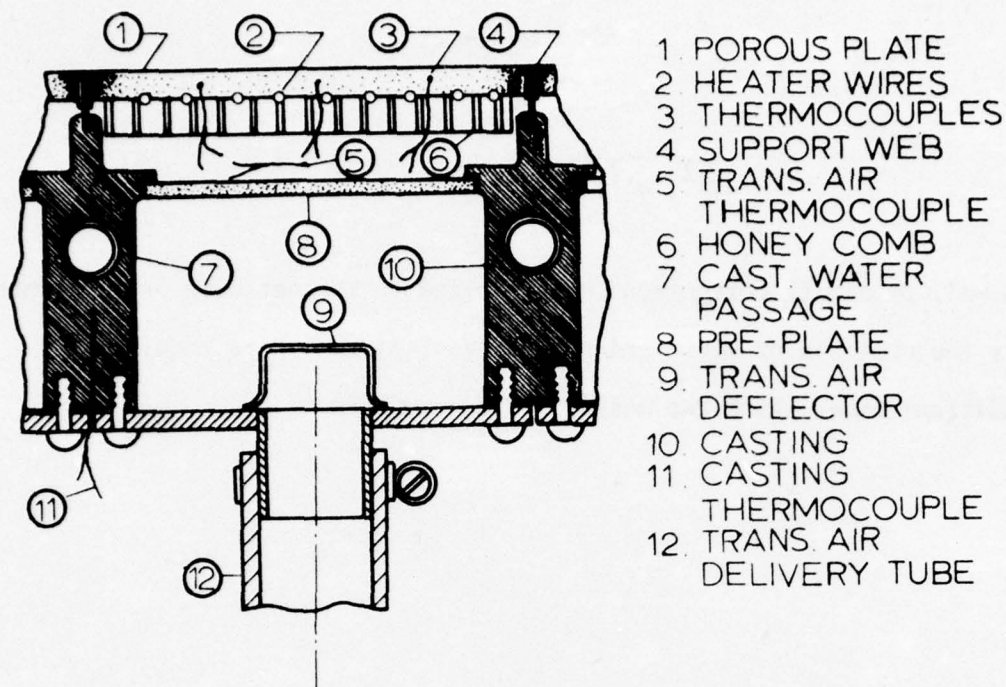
Cross-Section of Typical Test Plate--Casting Configuration
